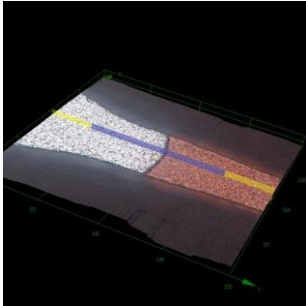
Soldermask interface after mask removal on immersion silver with proprietary SM pretreatment (SMAP)
